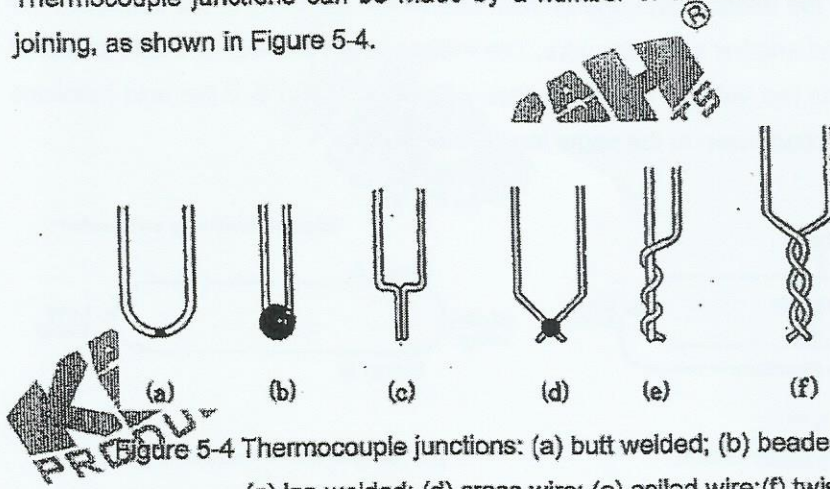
Thermocouple junctions: (a) butt welded; (b) beaded; (c) lap welded; (d) cross wire; (e) coiled wire; (f) twisted wire
